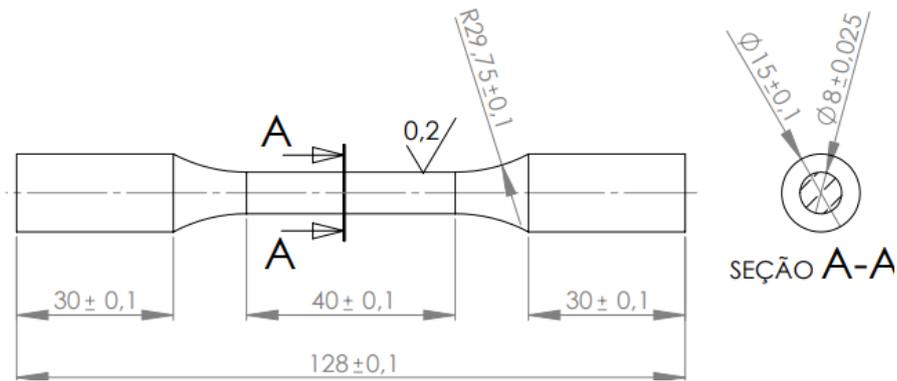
Geometry of the specimens used in the uniaxial tensile-compression tests.
